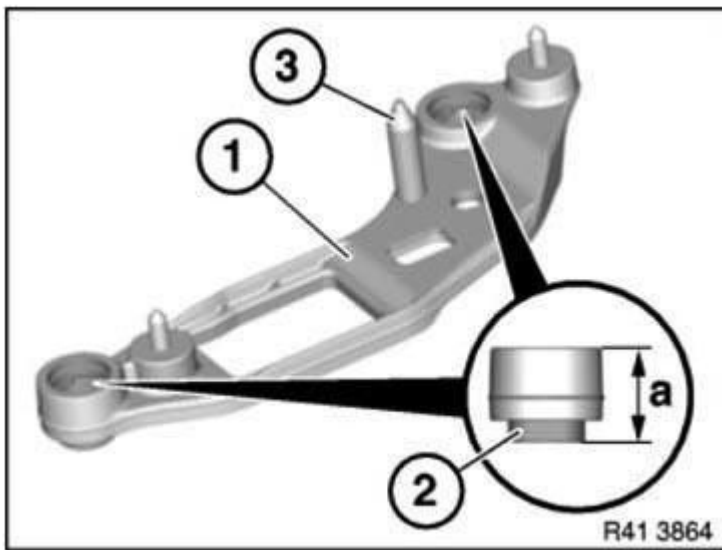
Identifying Consoles With Barrel Screws Dimension
